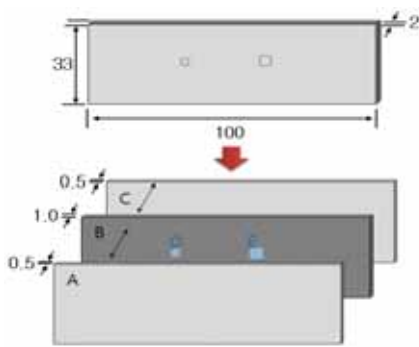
Dimension of the testing specimen for plate-type nuclear fuel
